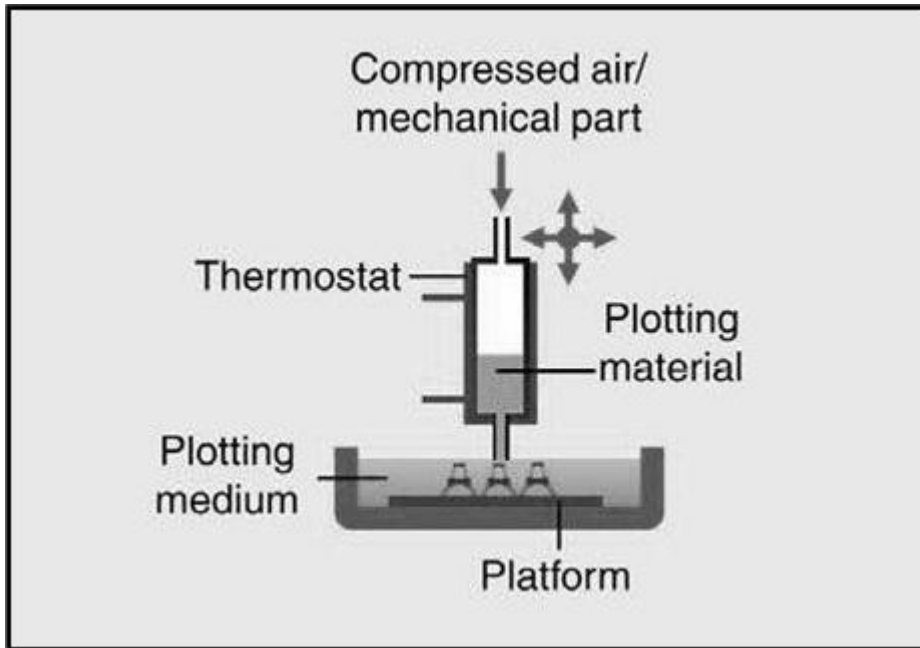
Direct Writing Assembly (C.W. Hull, 1986)
